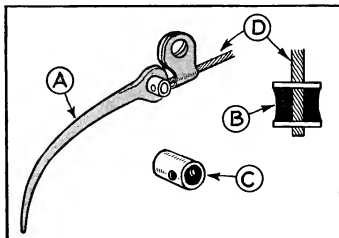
(A) Cotter pin. (B) Control cable housing. (C) Control cable. (D) Control cable cap. (E) Operating lever. The cotter pin can easily be pressed on to the cable just ahead of the nipple. When in position it will snap shut, the hole remaining at the cable.
